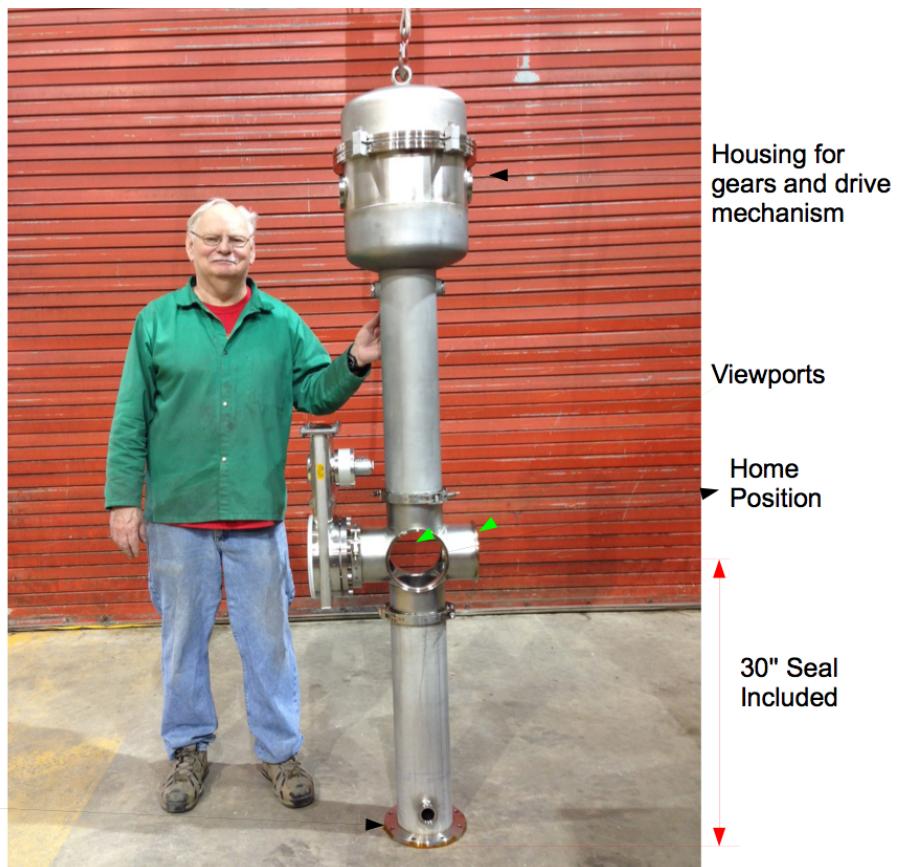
Shows the upper and lower assemblies together as they will be installed in CRH next to a welder for perspective. An additional 20 cm (8 inch) long pipe section has been added above the viewport to accommodate longer arms inside the upper assembly.
